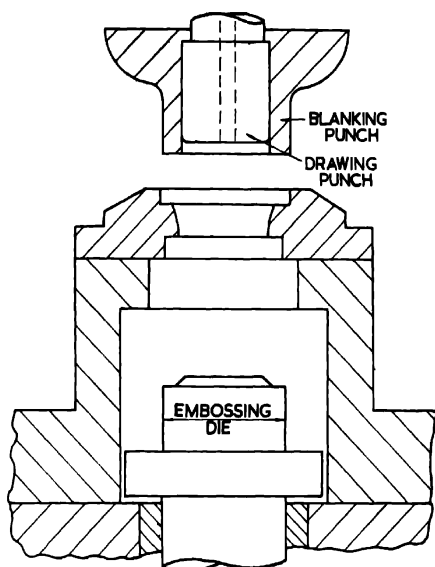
Example of triple-action die. Blanking—drawing—embossing
